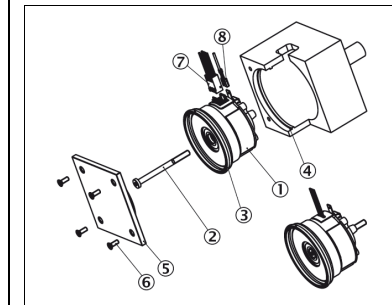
Assembly figure of SRS50S/SRM50S, conical shaft, rubber support
